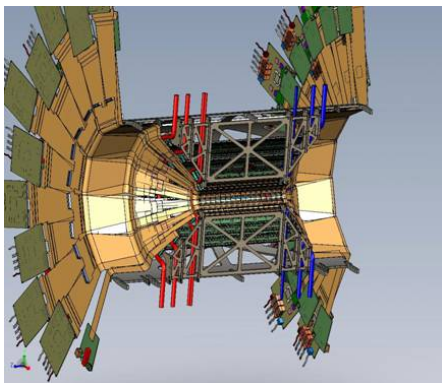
A 3D mechanical drawing of the PHENIX VTX detector. The drawing includes the support structures, the 4 layers of detectors, the signal cables, the read-out modules, and cooling tubes.
